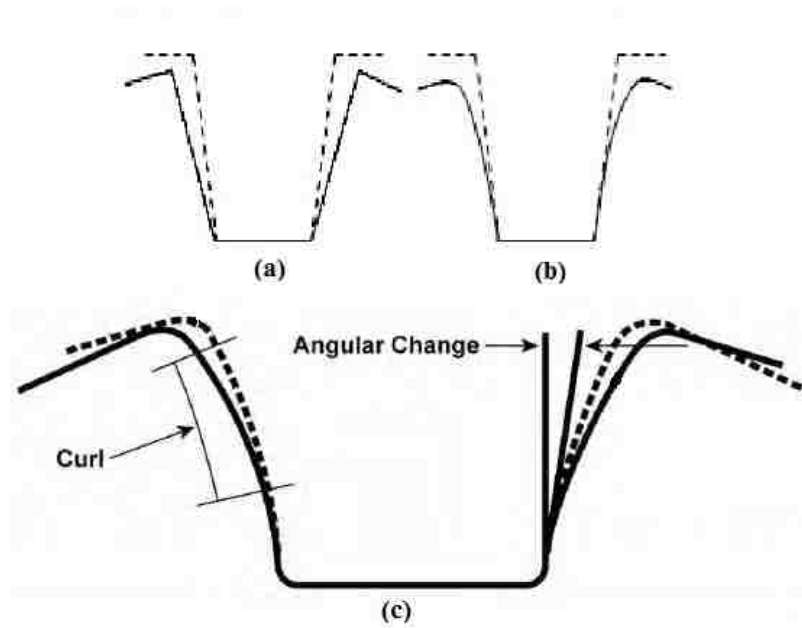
Different types of sidewall springback: a) wall opening, b) wall curl, [1]
